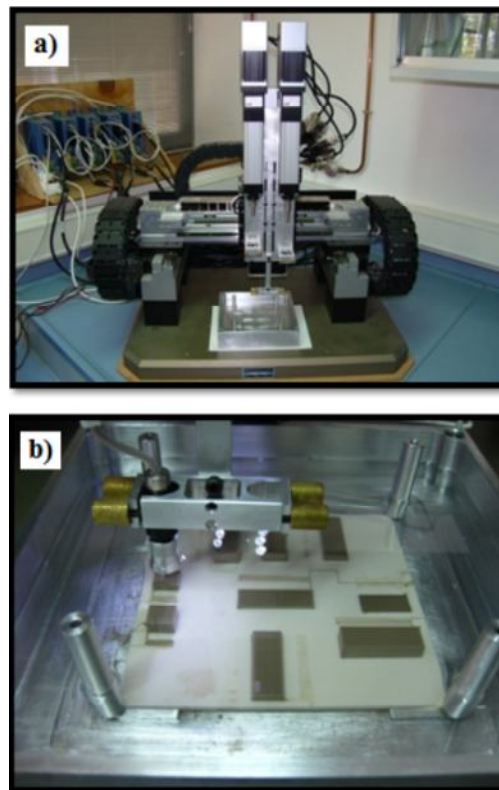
Optical images of (a) the robocasting system, (b) 3D structures as-deposited within an oil bath.
